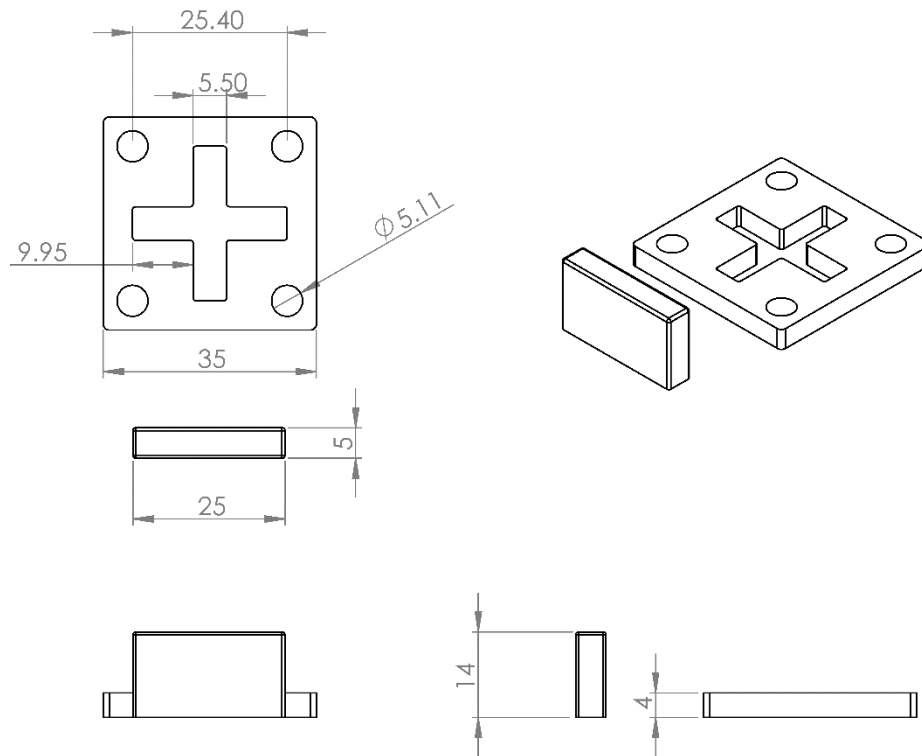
3D-printed mounting base and key for the vacuum cylinder holder, and laser pointer (unit: mm)
